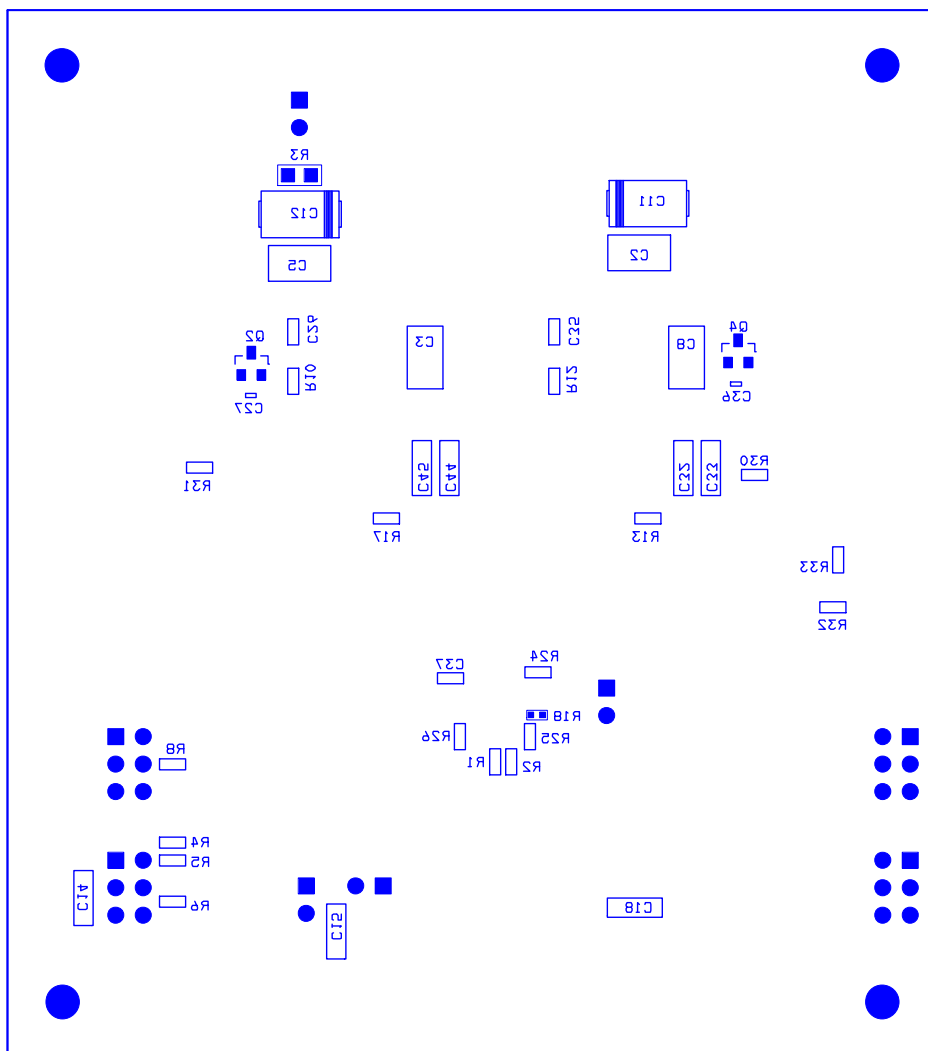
PCB - BOTTOM ASSEMBLY (TOP VIEW)
